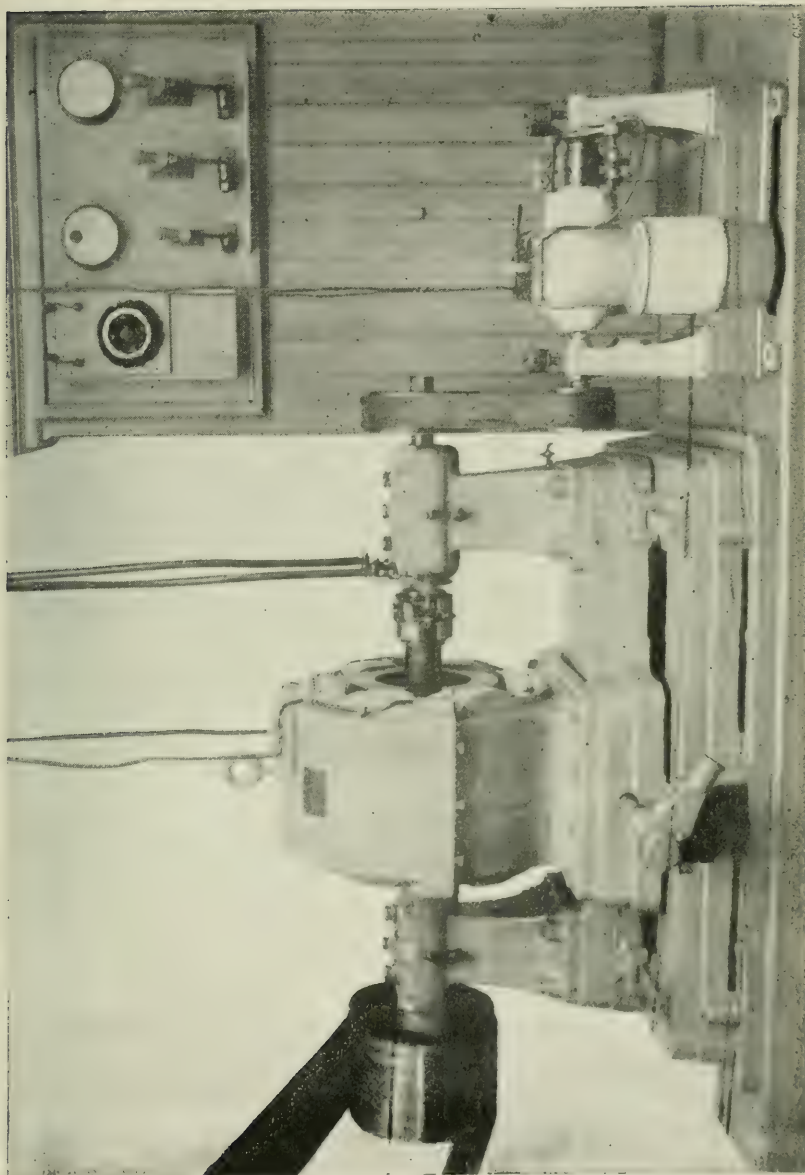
Reactive Coil, Switchboard, and Welder, with Bars ready to weld.
